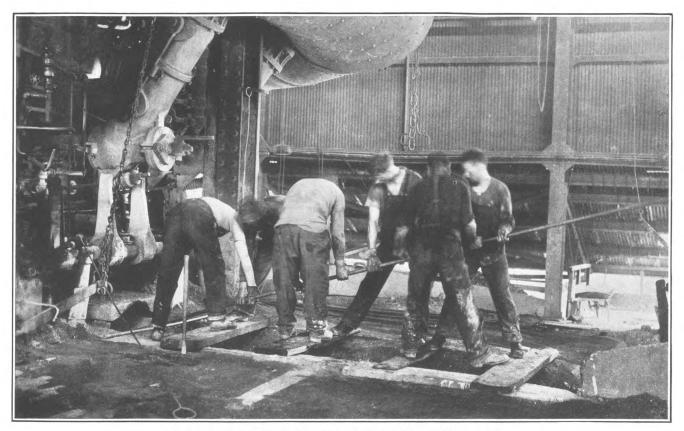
OLD, UNSAFE METHOD OF DRILLING A TAPPING HOLE.
